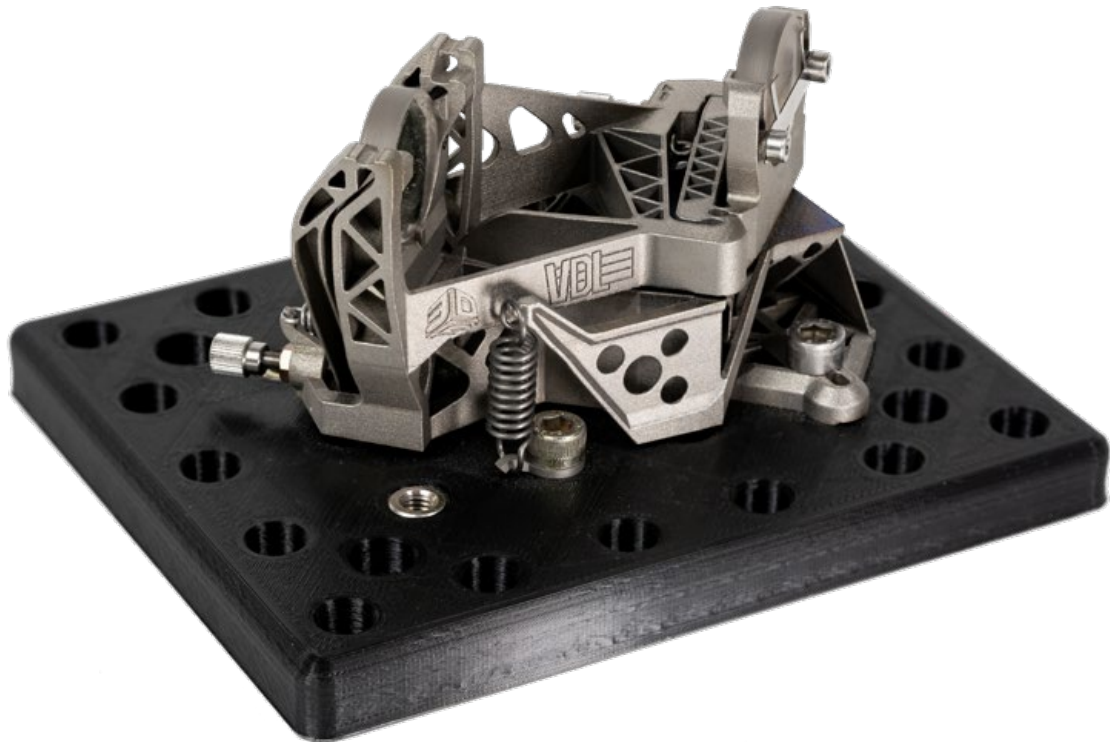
An additively manufactured optical assembly produced as a single consolidated part on 3D Systems' DMP 350 platform (Courtesy VDL)
